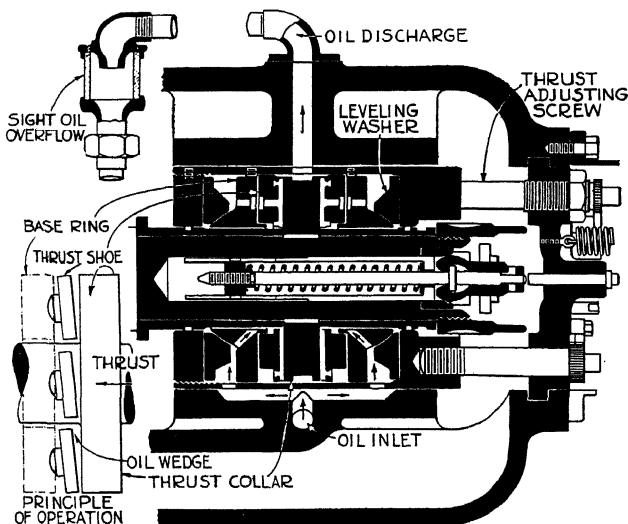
Kingsbury thrust bearing applied to a turbine. (Courtesy Socony-Vacuum Oil Co.)
